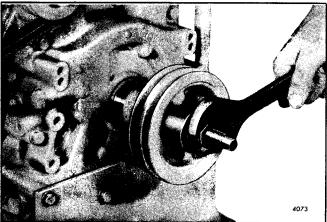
Installing Crankshaft Pulley Using Installer J 7773
